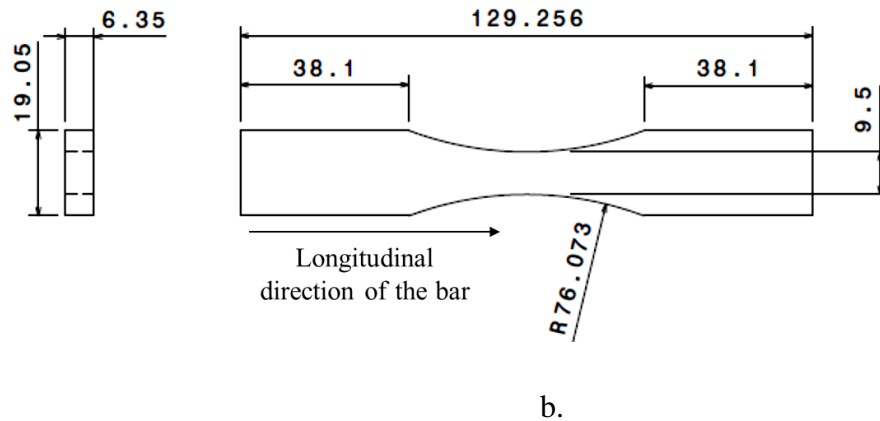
Specimen dimensions (mm) a. axial fatigue test specimen, b. residual stress relaxation specimen (cont'd)
